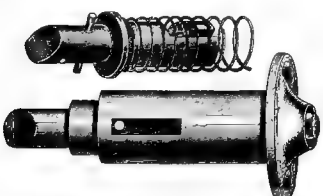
Seat Back Arm Lock, Bolt and Spring. Adams & Westlake Company.
